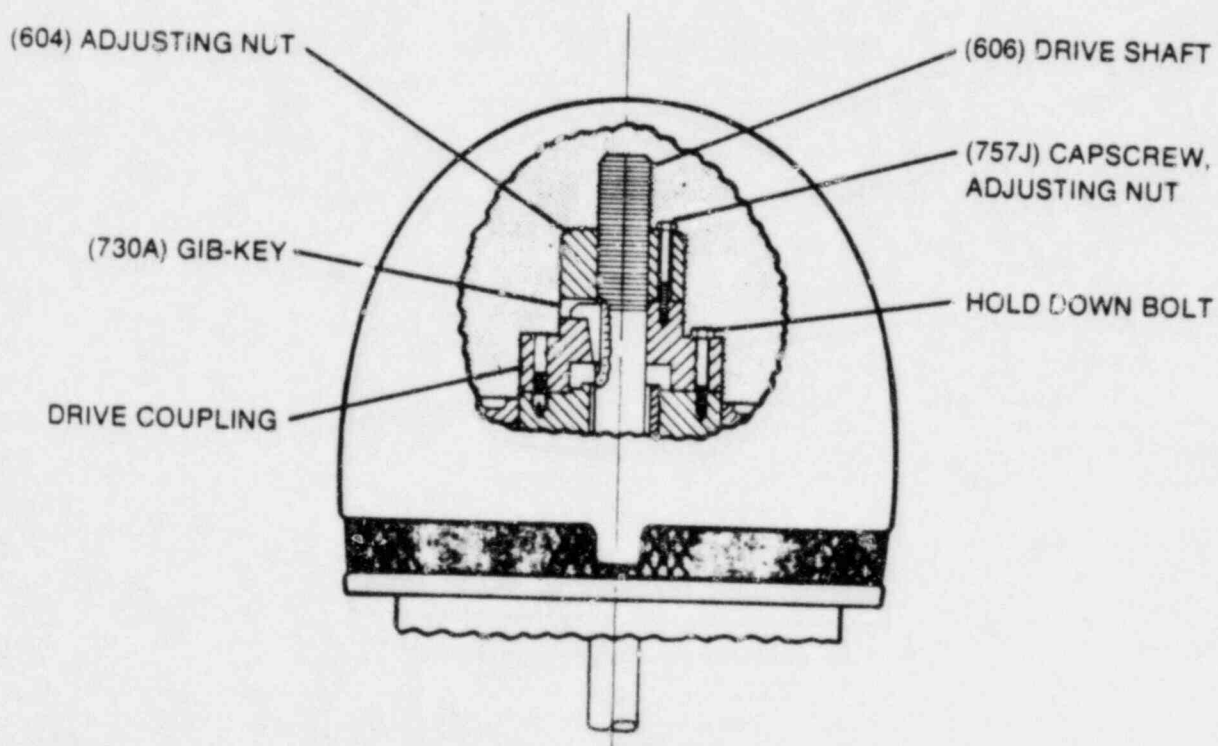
A2. HOLLOW SHAFT ADJUSTING NUT
